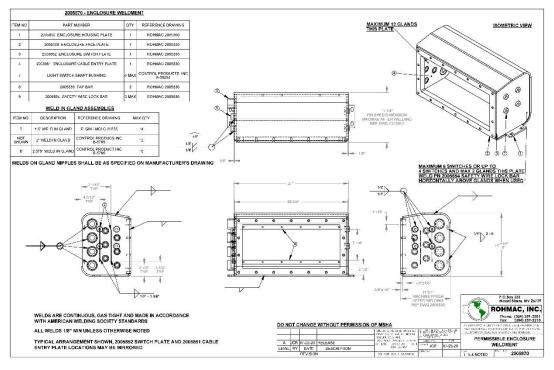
XP Enclosure Application Weldment Drawing
